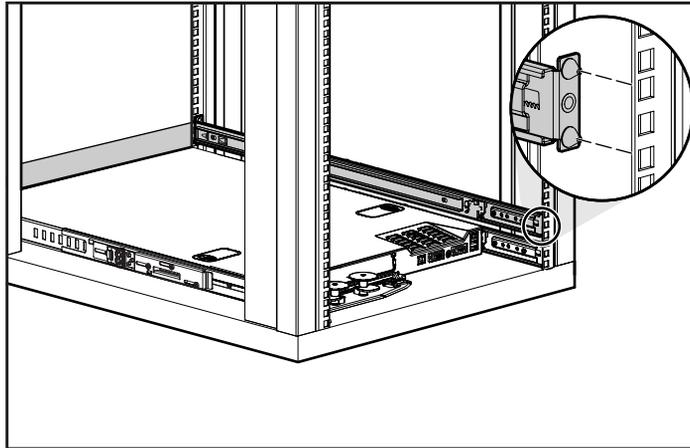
Aligning the rear alignment pins of the fixed rack rail with the rear holes (rear view)
